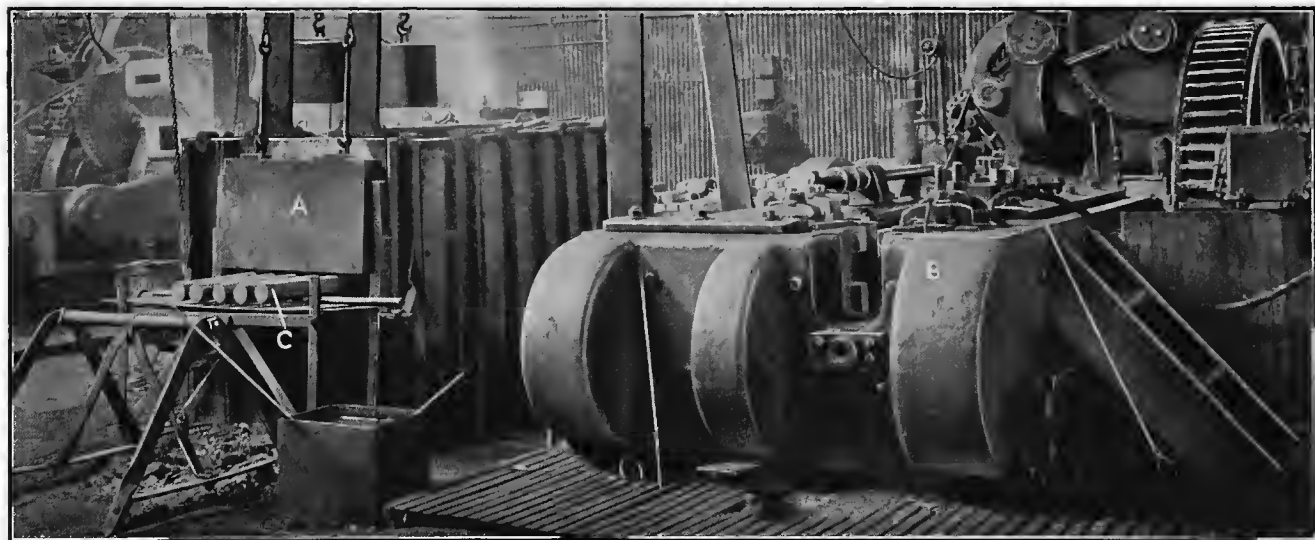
FURNACE AND CUTTING-OFF MACHINE
